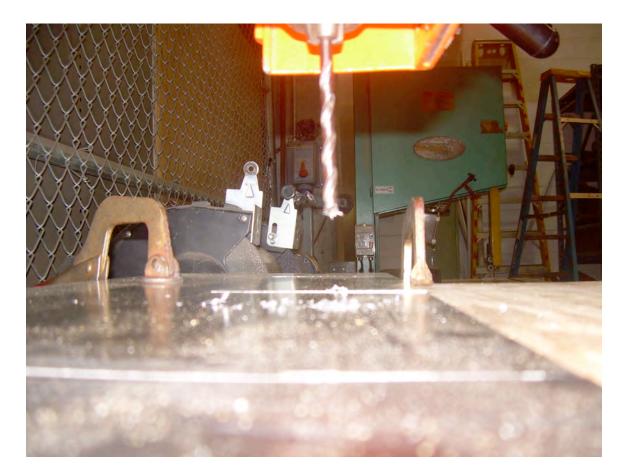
Preparing holes for spot welds with a drill press.
